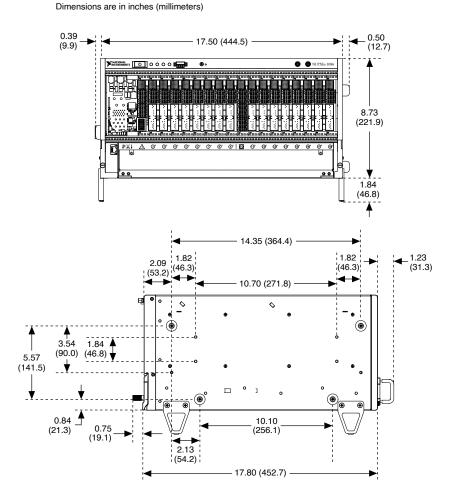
PXIe-1086 Chassis Dimensions (Front and Side)
